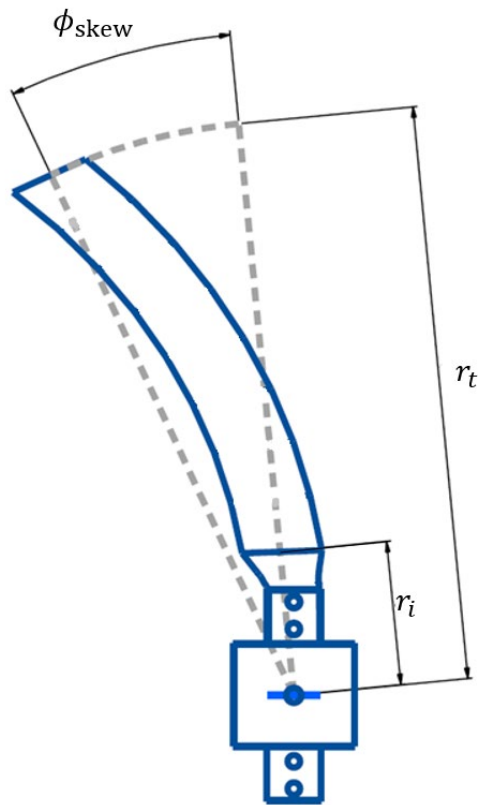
Illustration of a skewed blade with the skew angle, inner radius and tip radius shown.
